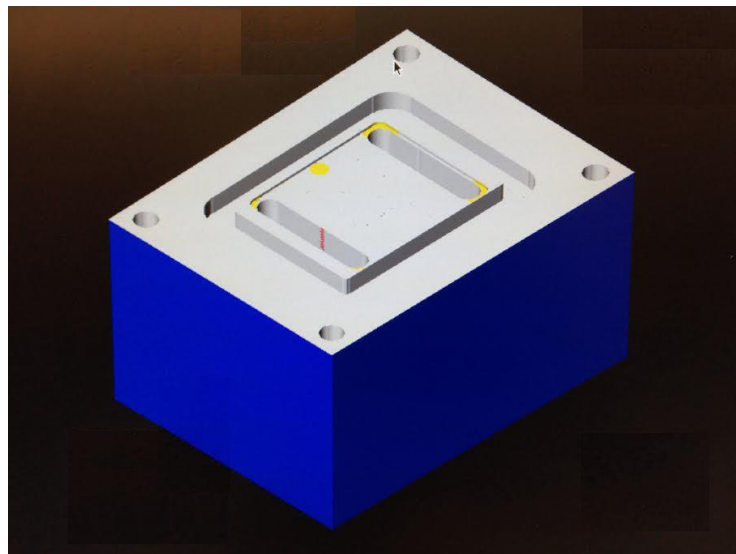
3D AutoCAD drawing for bottom part of the CPVC cell.
